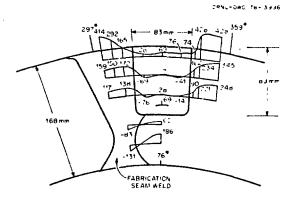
Location of the weldment zones in a cross section of the V-8 prototype half-bead repair weld in the ITV-8 prolongations. Precracked Charpy V-notch and Diamond Pyramid Hardness tests were made across the weldment interfaces identified as A-A, B-B and C-C.
